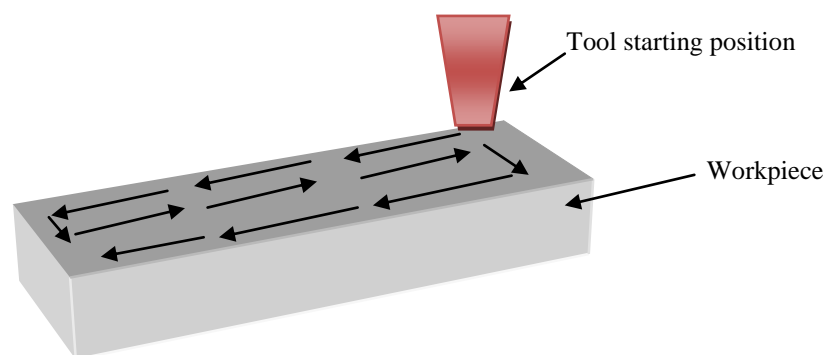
Schematic diagram of tool following the raster scanning path for finishing the workpiece surface
